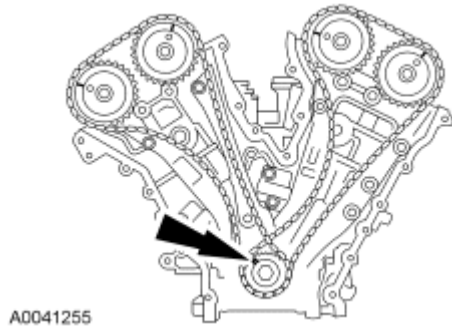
Identifying Crankshaft Keyway In 11 O'Clock Position
